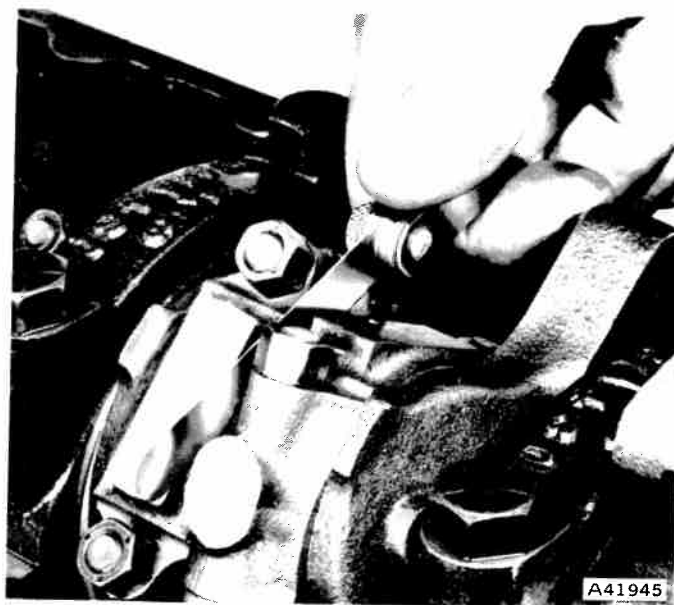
B-32 Connecting Rod Side Clearance Measurement
